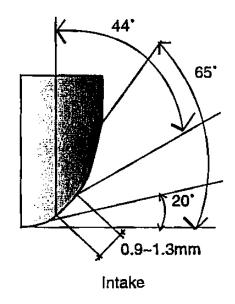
Grinding Valve Seat Courtesy of KIA MOTORS AMERICA, INC.
